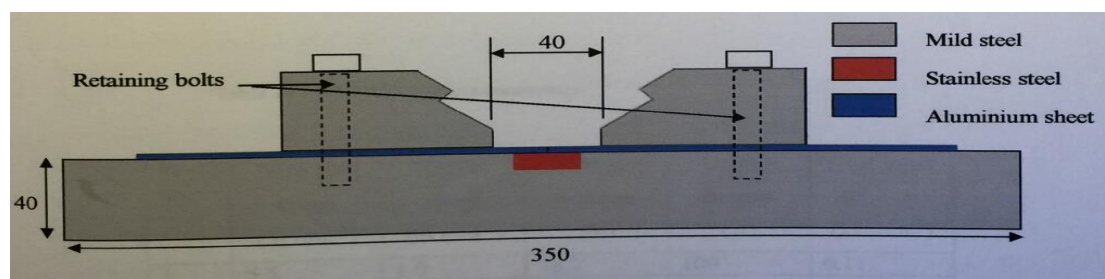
Schematic cross-section of the MIG welding set-up [98]
